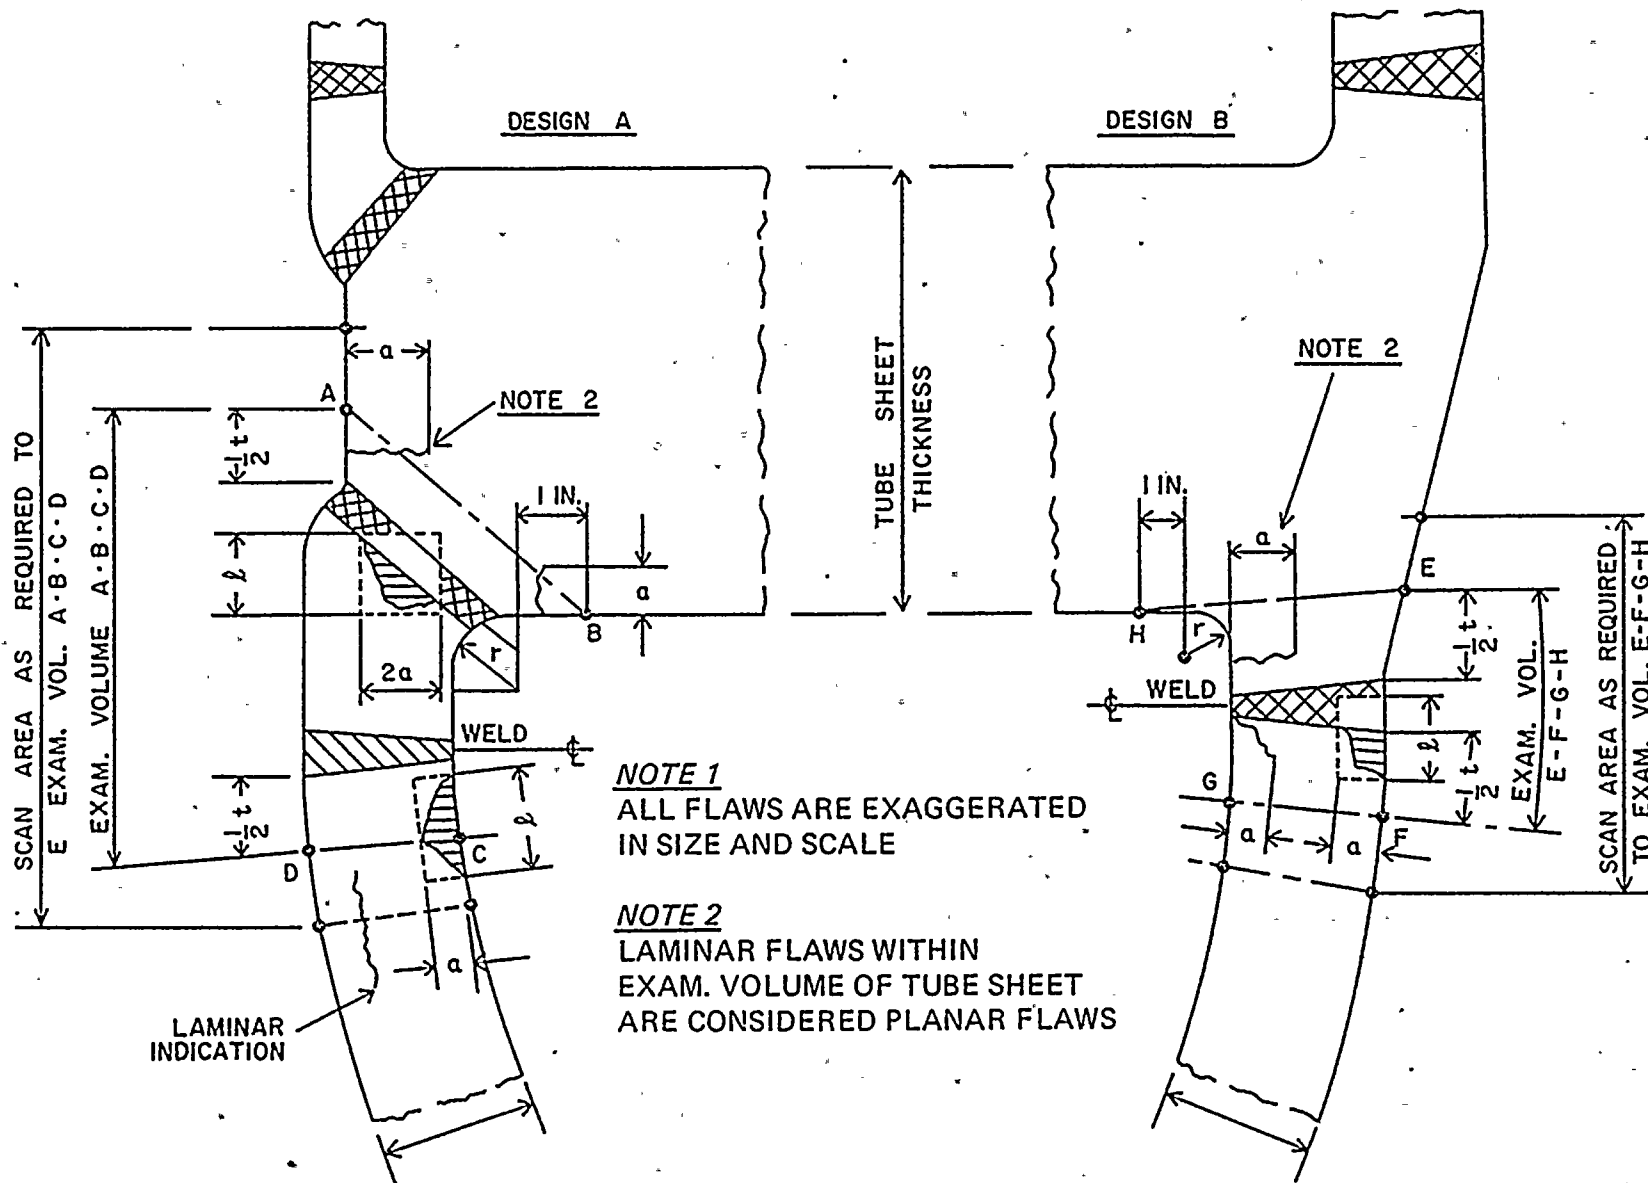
(f) TYPICAL TUBE SHEET-TO-HEAD WELD JOINTS
